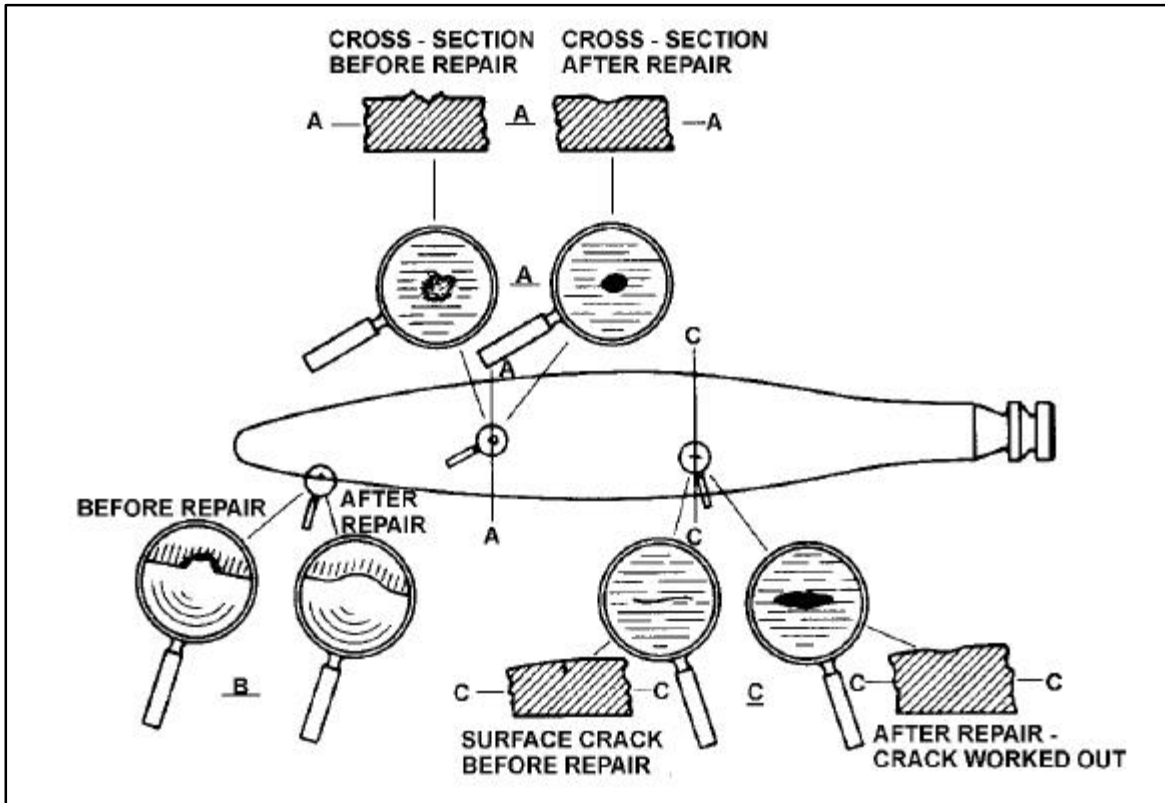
Method of repairing surface cracks, nicks, etc., on aluminum-alloy propellers.
